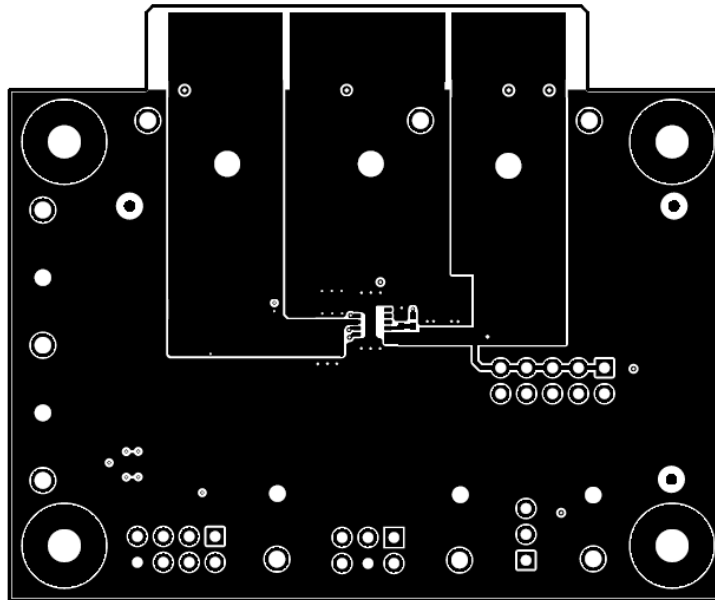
Adjustable Output Board Layout - Top Layer Copper
